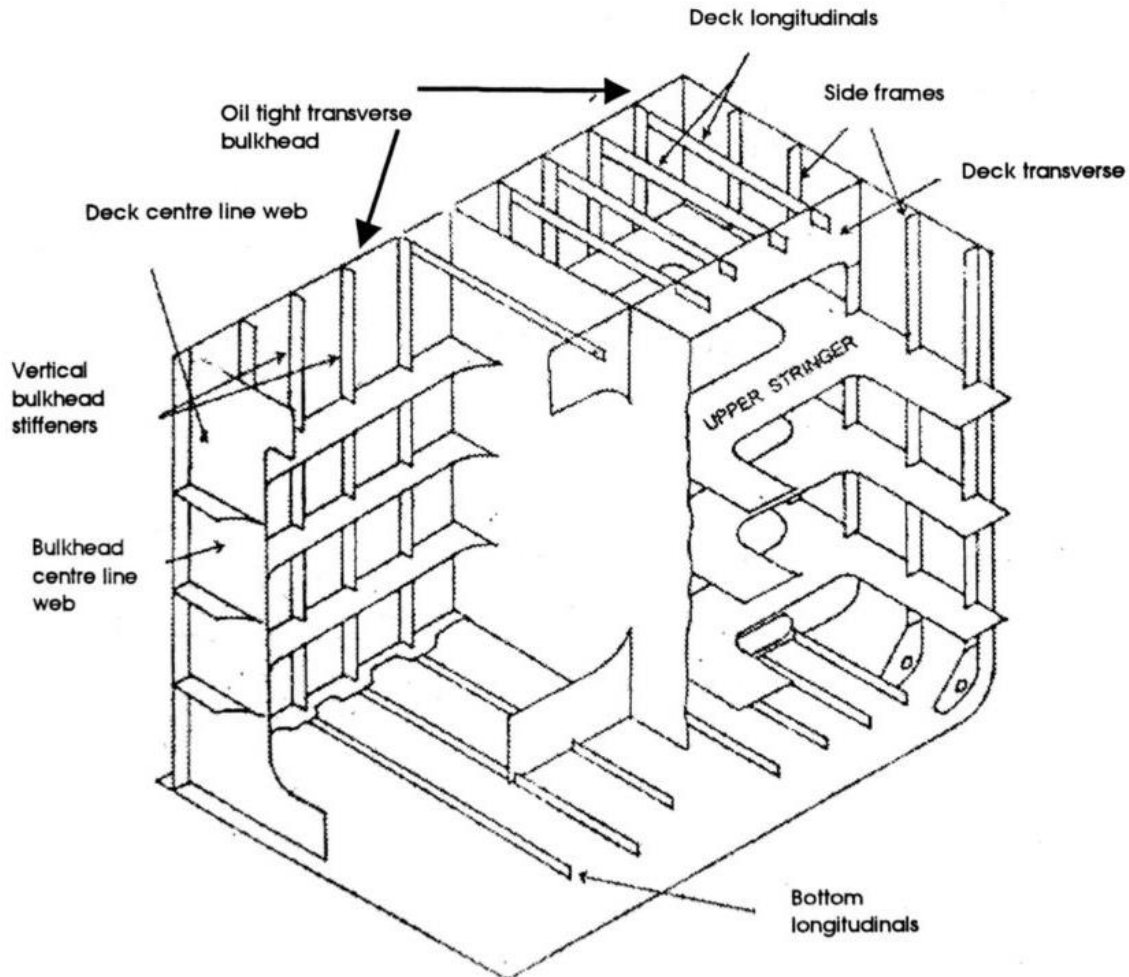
Vessel bulkheads, deck longitudinals and deck transvers frames [36]
